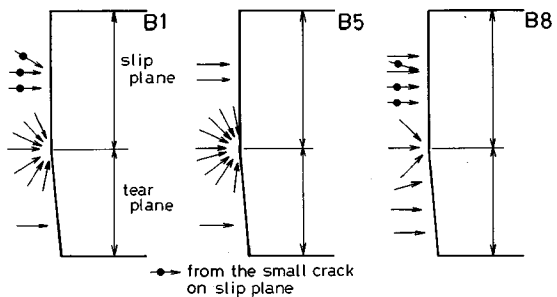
Fatigue crack initiation points on the wall of punching hole.
